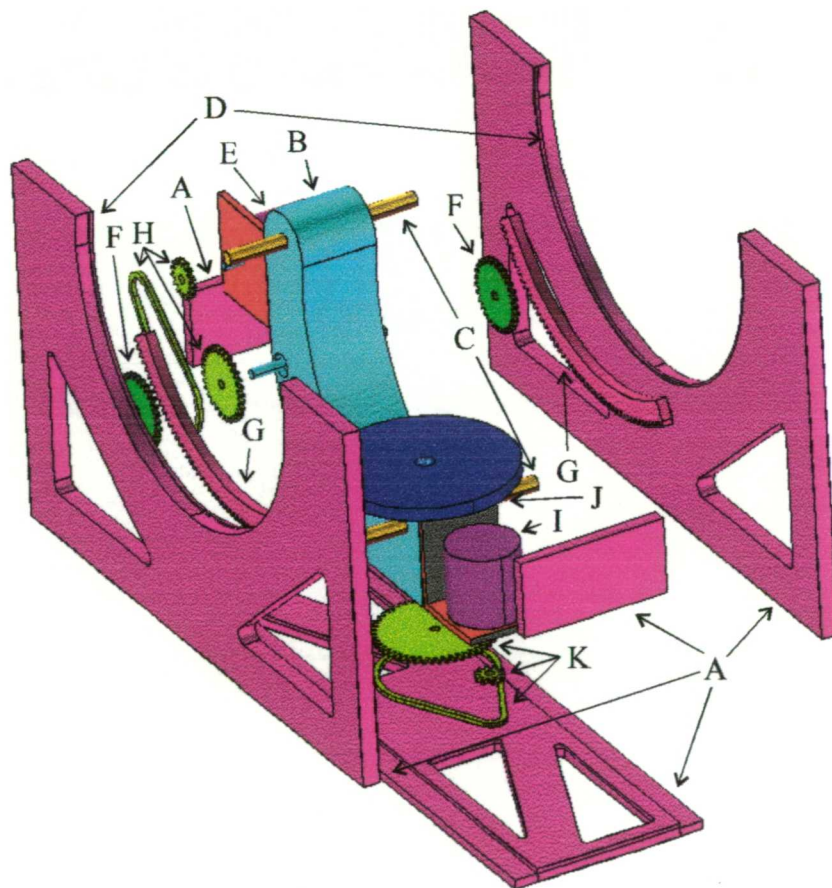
The principal mechanical components of the UJR Joint Simulator.
